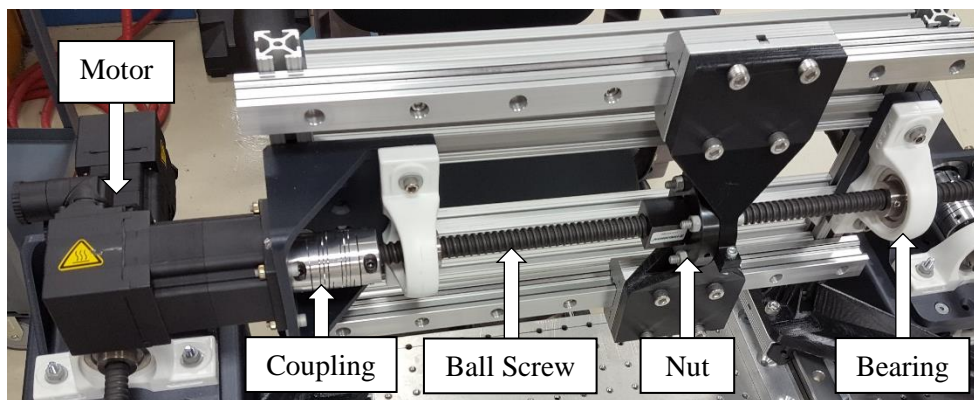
Servomotor-driven ball screw with ultra corrosion-resistant pillow bearing end supports and nut between supports.
